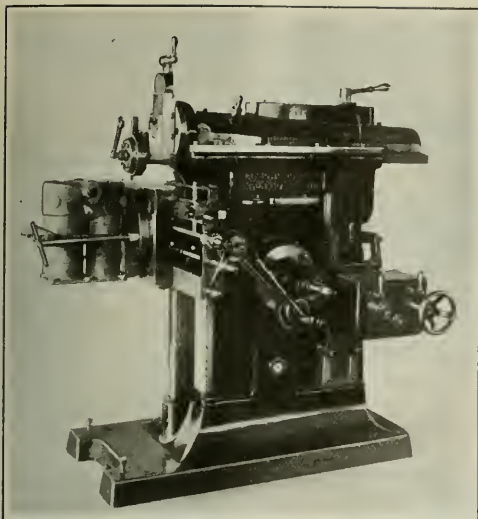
Equipment used for machining the End of an Automobile Cylinder Block on a Shaper
